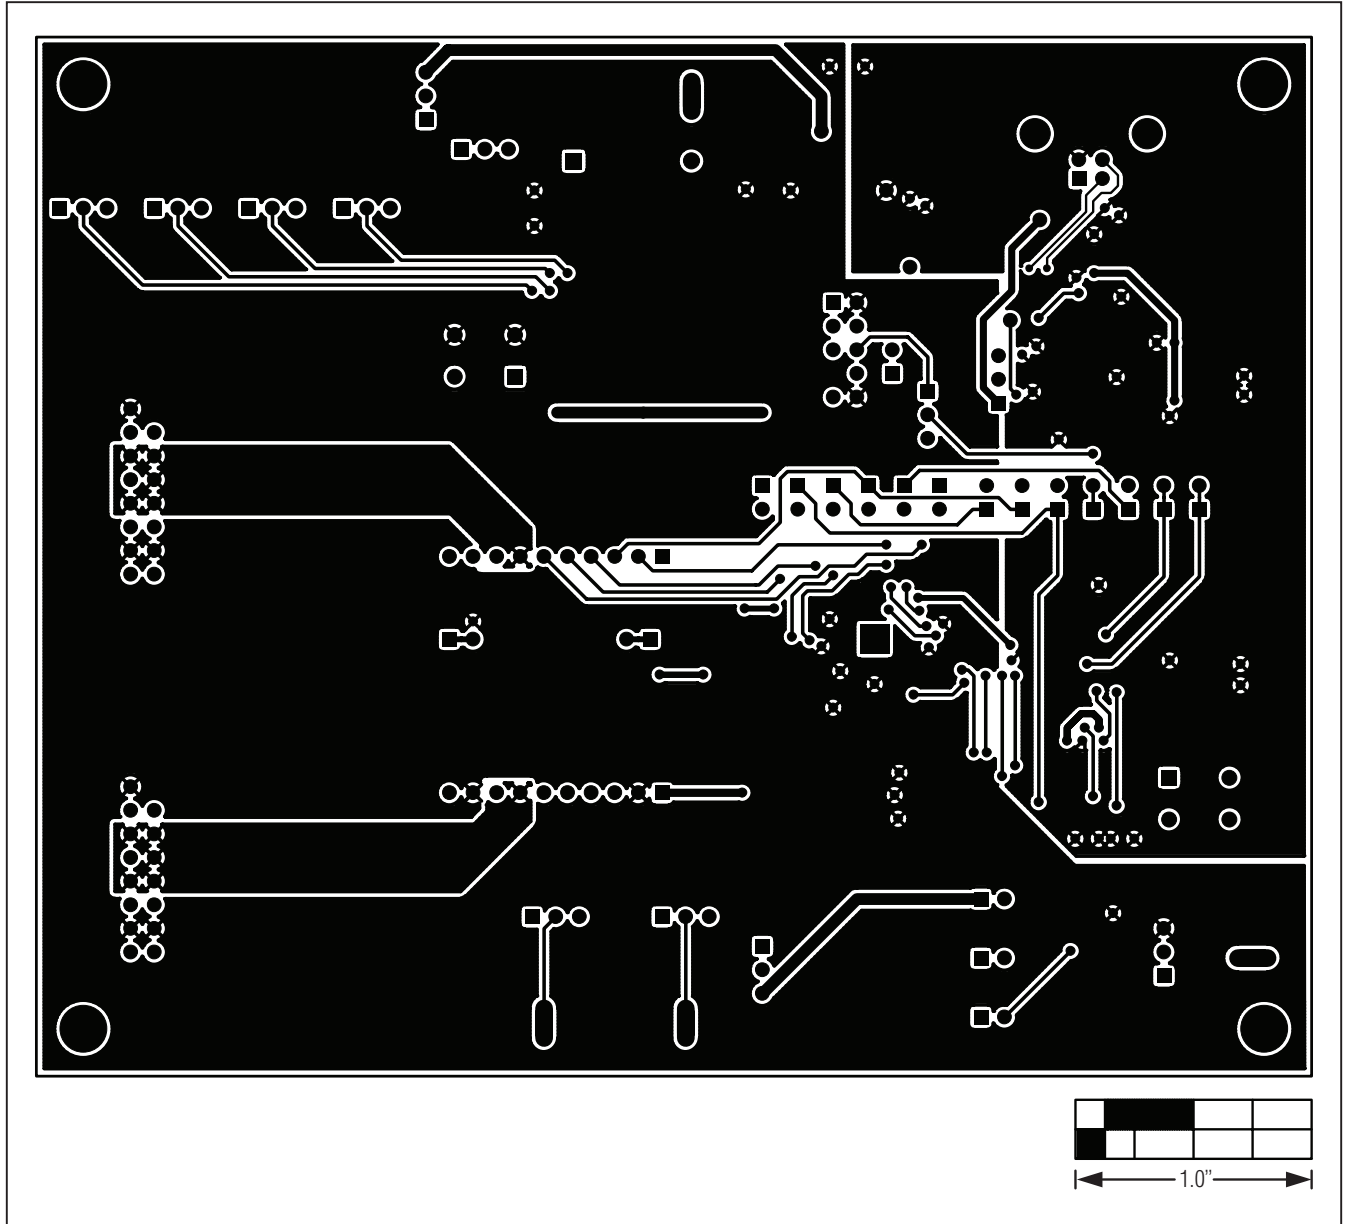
MAX1441 EV Kit PCB Layout—Solder Side
